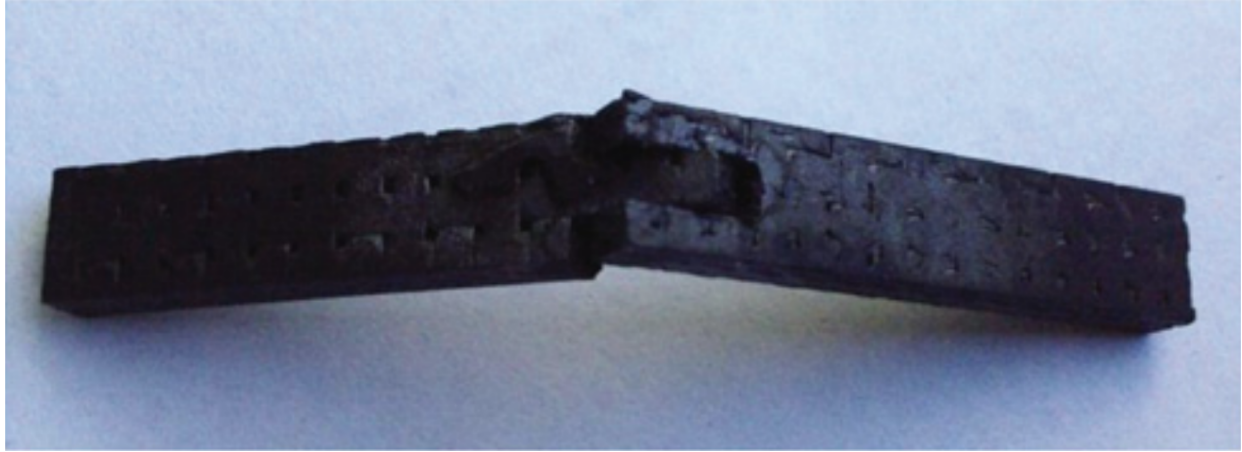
A laser-machined SiC/SiC joint. [30]
